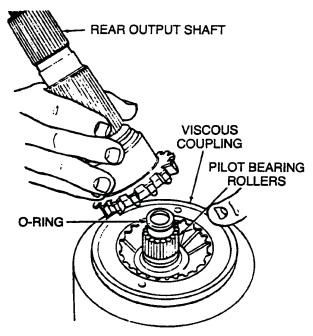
Remove Rear Output Shaft, Pilot' Bearing Rollers and O-Ring
